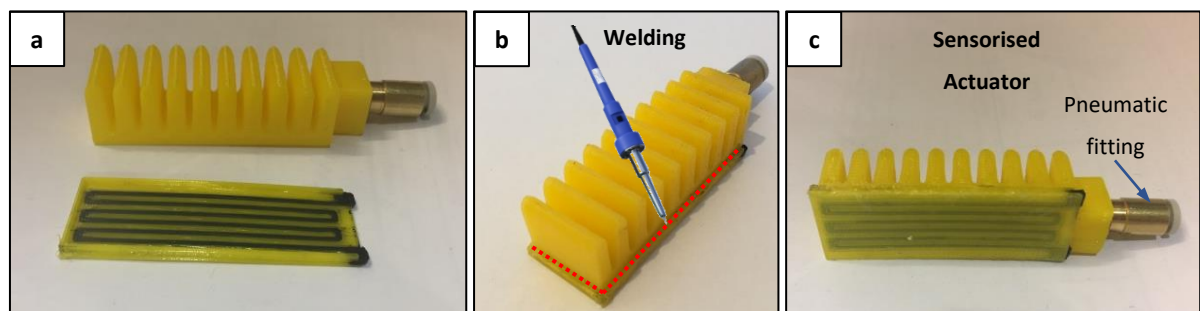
Welding the printed bending actuator and strain sensor together to create a sensorised actuator. (a) Individual actuator and sensor after printing, (b) soldering iron used to weld along the raised step of the sensor, (c) sensorised actuator after welding.
